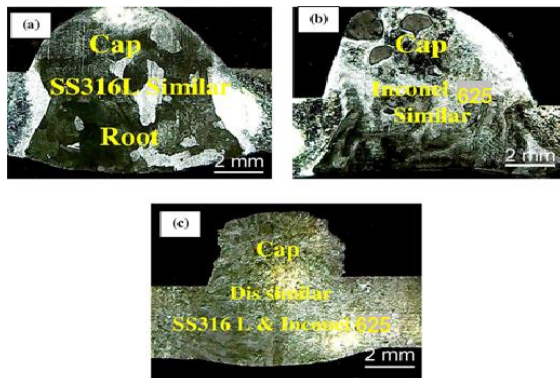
Cross section macro-photographs of weldments (a) SS316L similar joints (b) Inconel 625 similar joints (c) SS316L and Inconel 625 dissimilar joints.
